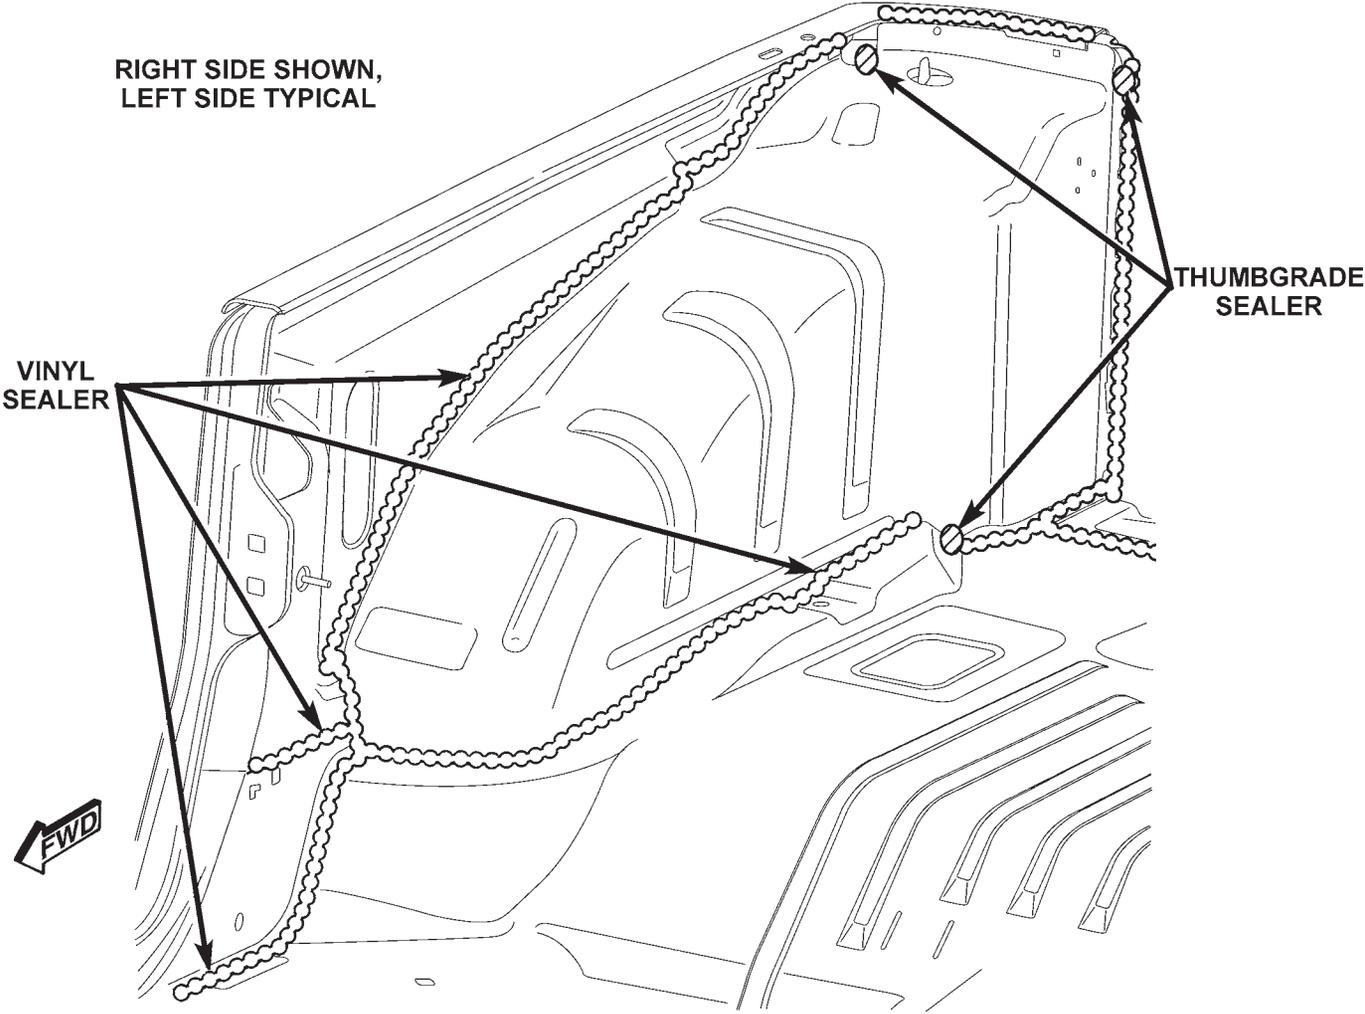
Floor Pan/Quarter Panel/Wheelhouse – JK72
